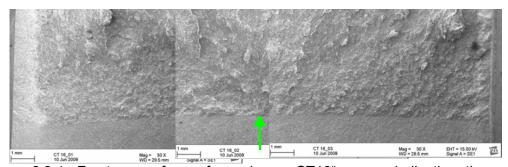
Fracture surface of specimen "CT16", arrow indicating the crack initiation site.
